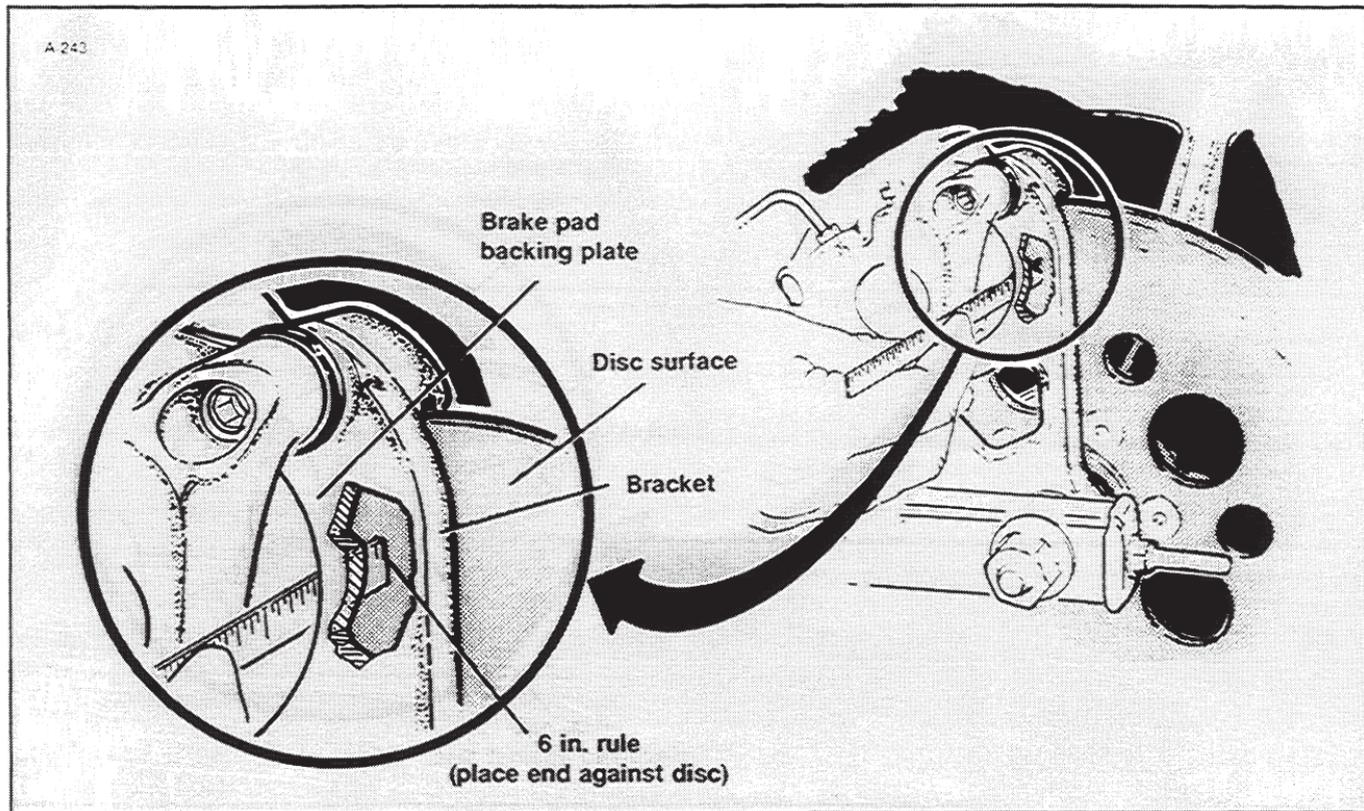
Measuring Rear Brake Outer Pad - XLH Models
